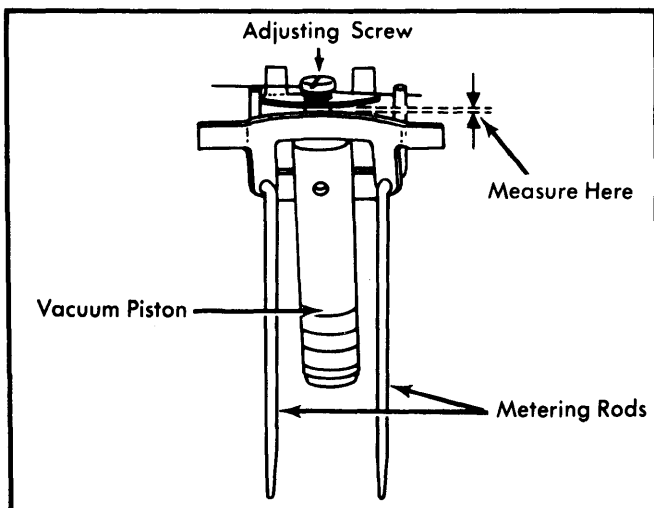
Vacuum Step-Up Piston Gap Qualification
